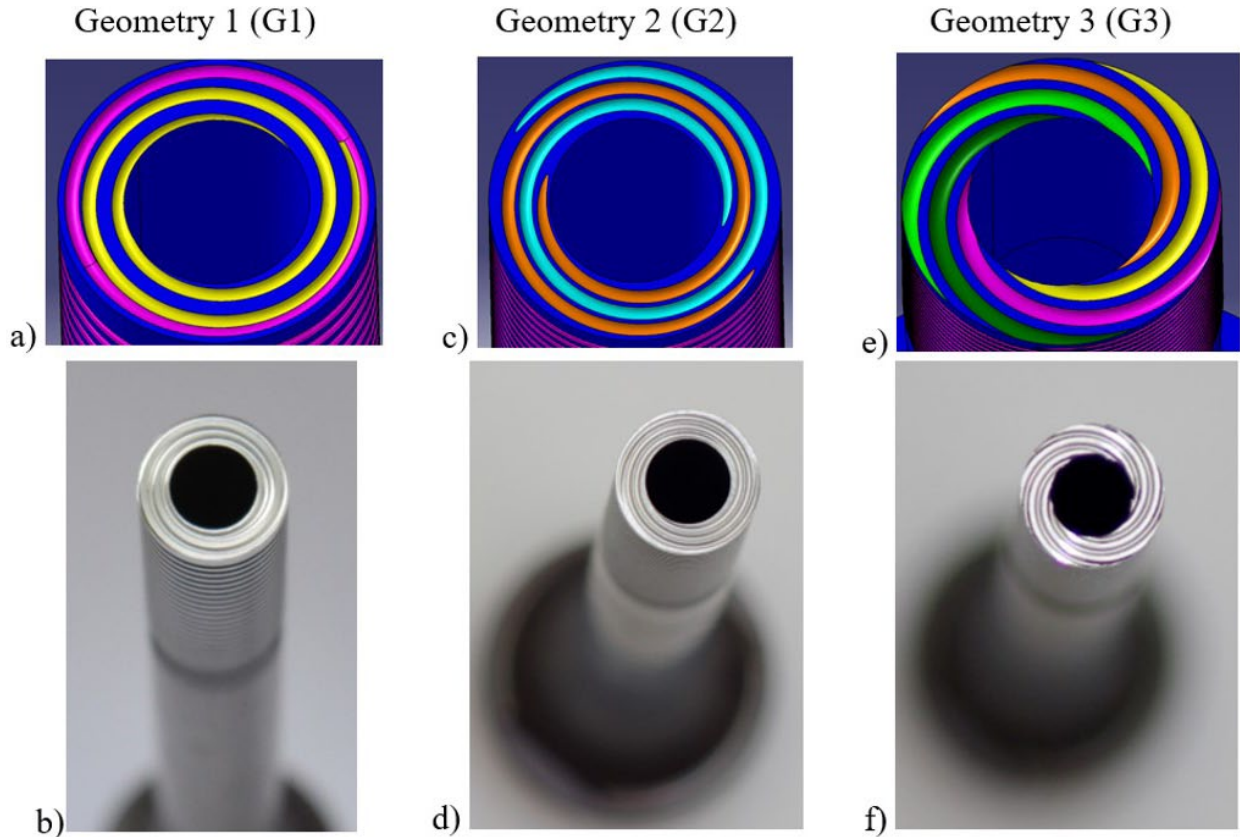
Developed geometries: a) model view of geometry G1, b) photo of G1 rows made on the inner sleeve, c) model view of geometry G2, d) photo of G2 rows made on the inner sleeve, e) model view of geometry G3, f) photo of G3 rows made on the inner sleeve
